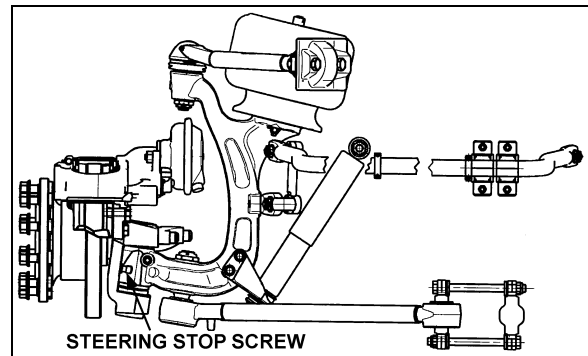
STEERING STOP SCREW ON IFS 14063
